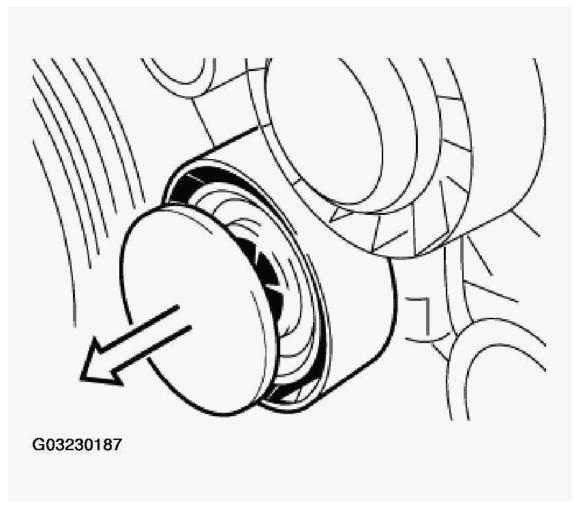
Removing Cap From Tensioning Roller Courtesy of BMW OF NORTH AMERICA, INC.
